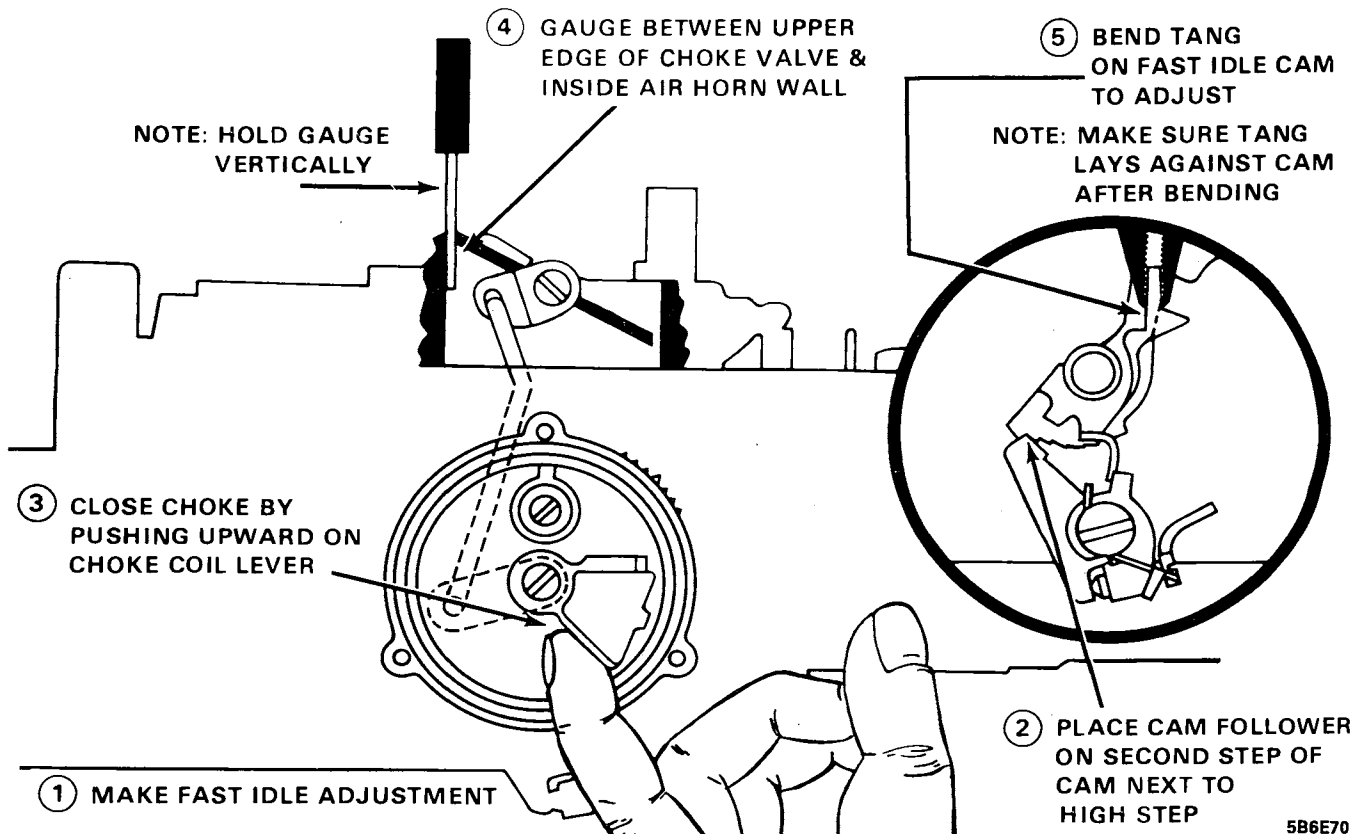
E-70 - Fast Idle Cam (Choke Rod) Preliminary Adjustment
